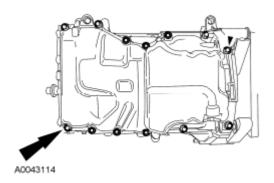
Removing Bolts And Oil Pan Courtesy of FORD MOTOR CO.
